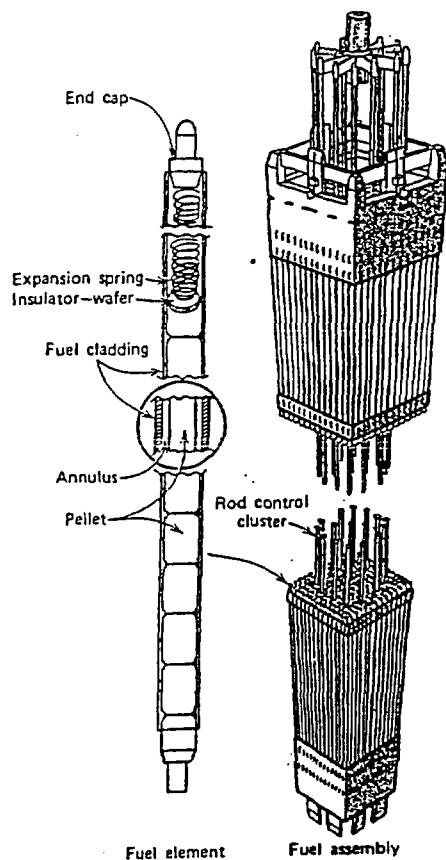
Fuel rods, also called fuel pins or elements, are bundled together into fuel assemblies as shown here. This fuel assembly is for a PWR reactor. SOURCE: Duderstadt and Hamilton (1976; Figure 3-7).
